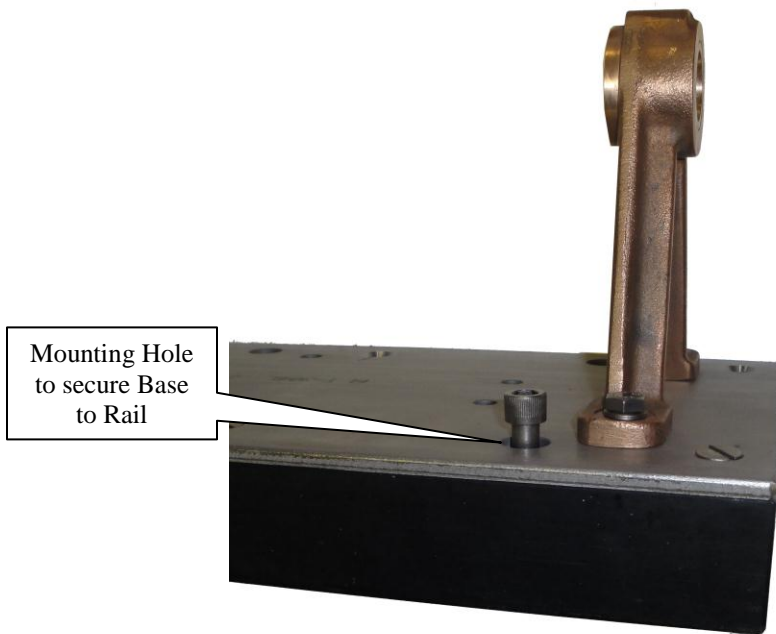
Mounting Bolts are to be inserted into the hole, Securing the Black UHMW Rails to the Vessel
